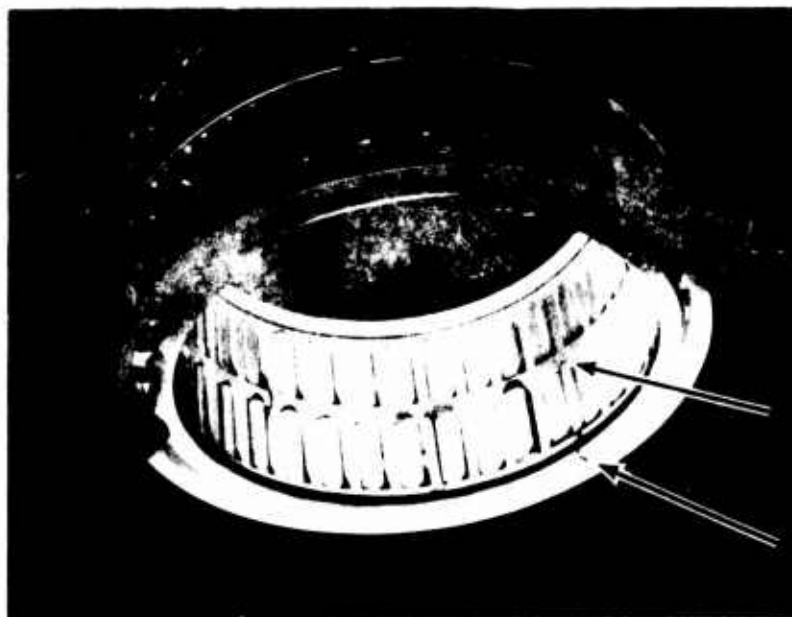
Cracks on Inner Cage After Nonrotating Cyclic-Torque Fatigue Test--Assembly Similar to Design D.
